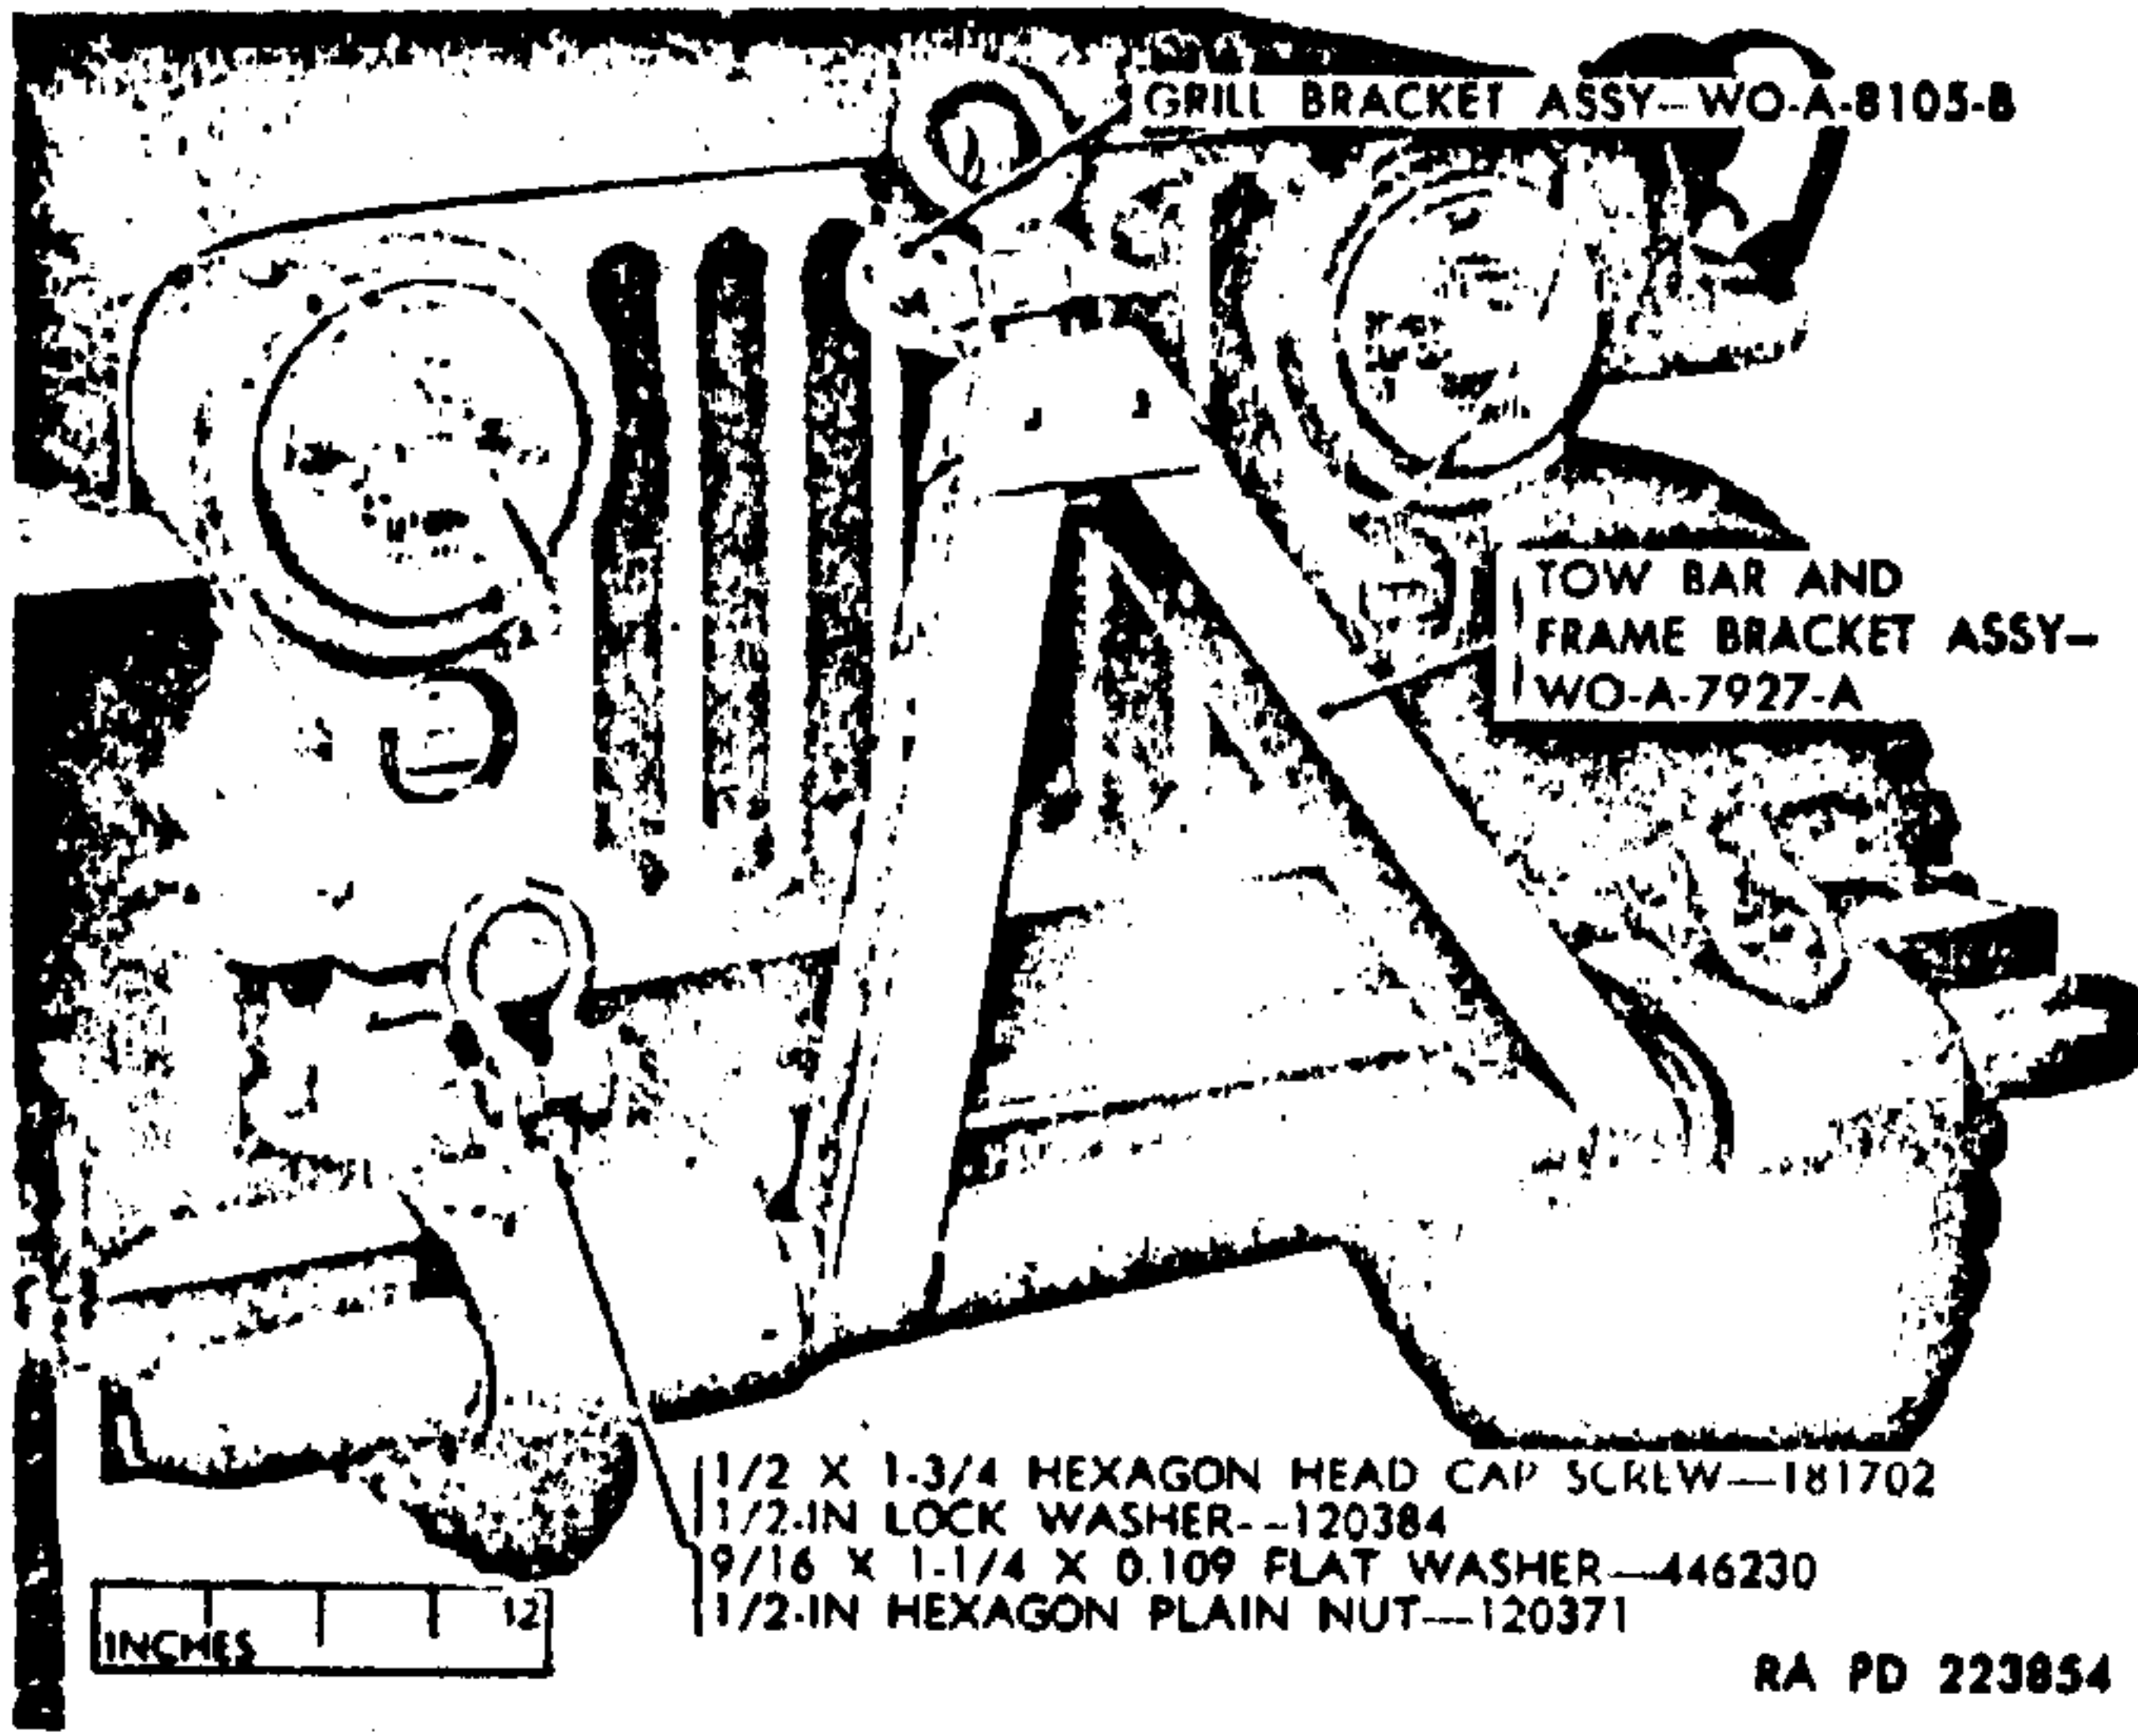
Tow bar and frame bracket assembly and grill bracket assembly installed.
